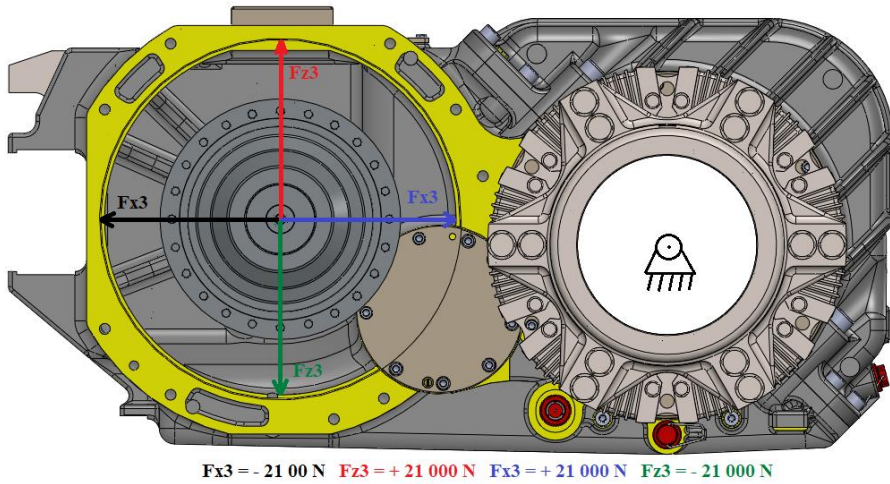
Inertial load of the rotor on the motor bearing.
